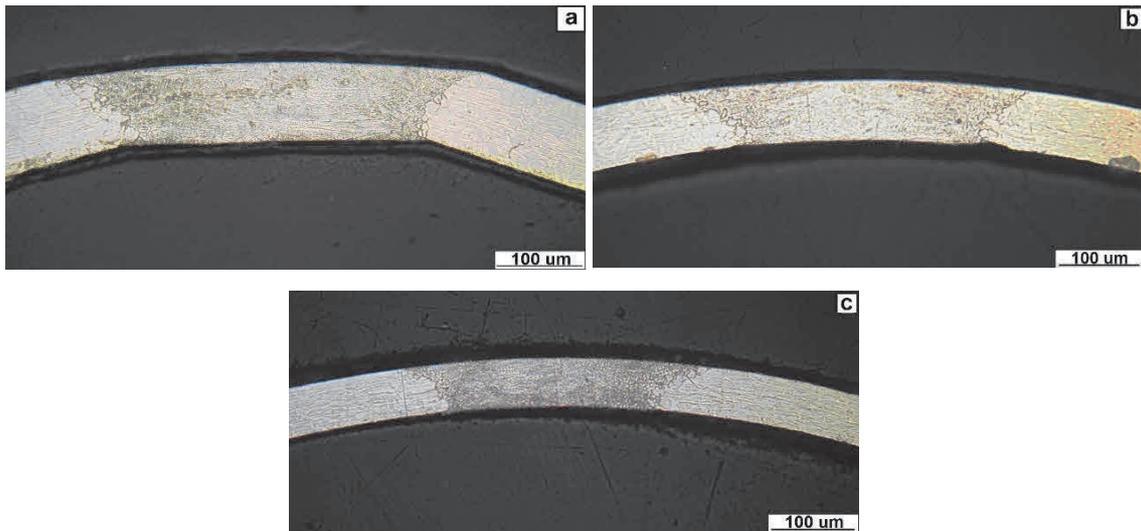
The weld joint of tube THYSEN after a) welding, b) the first draw, c) the second draw
